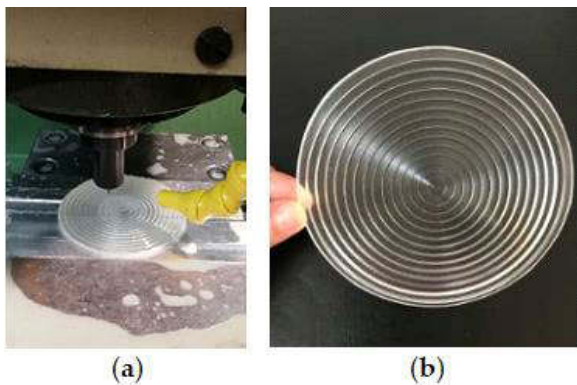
CNC machining process: (a) Open-face CNC machining of lens; (b) Finished CNC-machined acrylic lens (the 5-mm-thick lens)
